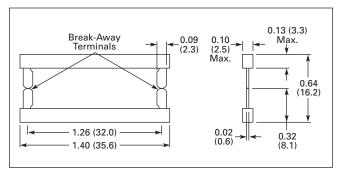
D3PJ1 — Approximate Dimensions in Inches (mm)
